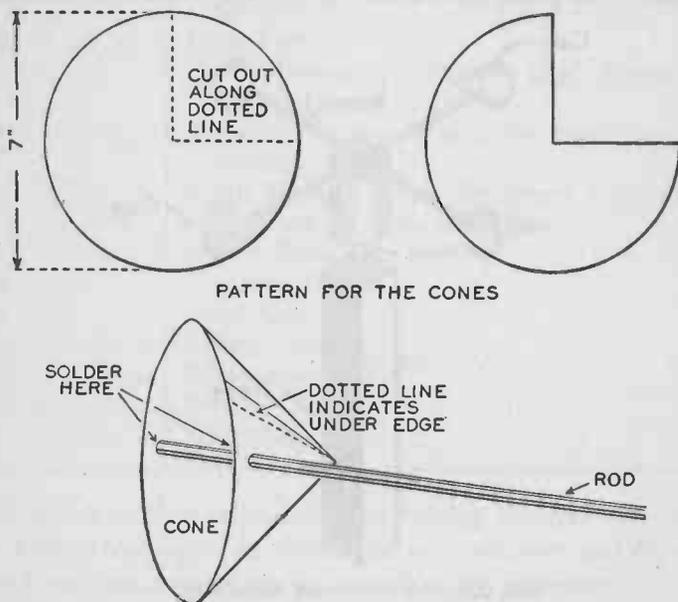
The pattern for the cones is a circle with a quadrant cut out as shown. A cone is soldered on each of the four rods.
